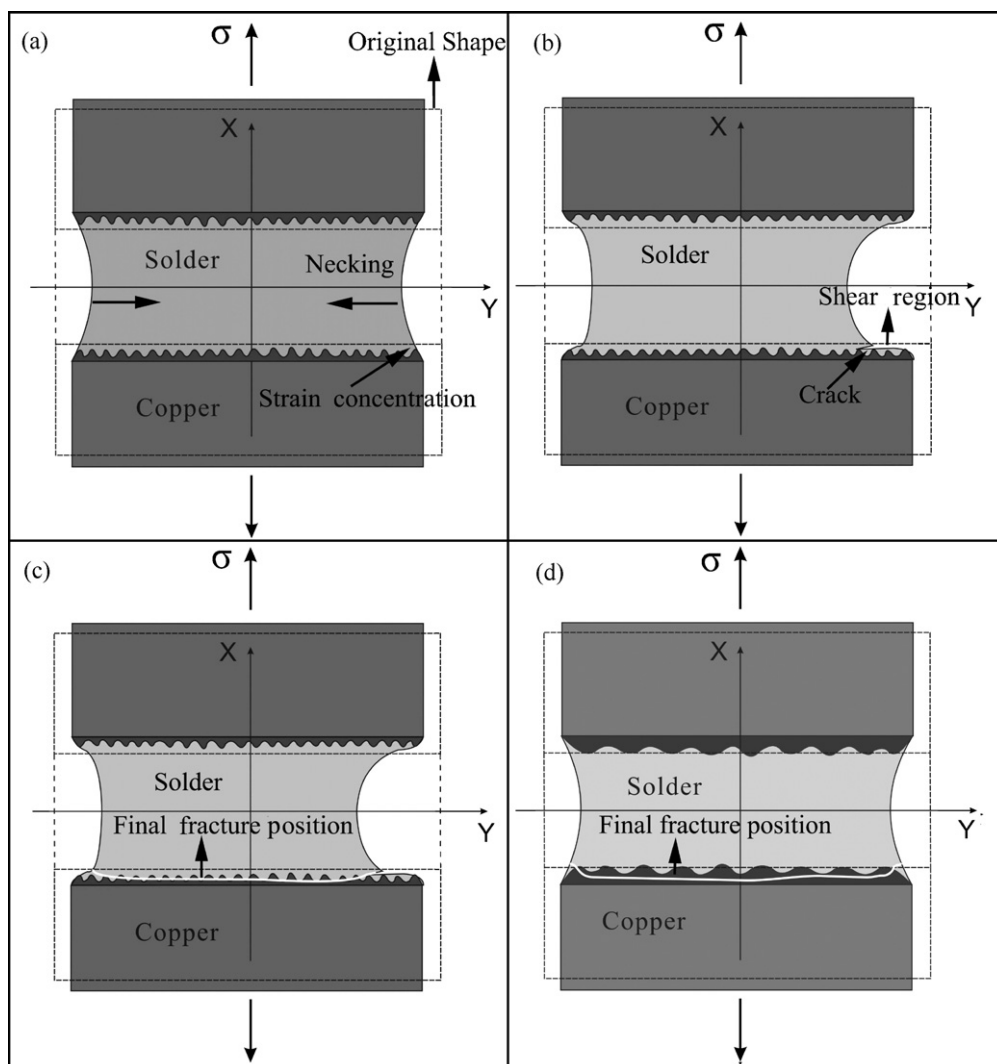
Illustration of the fracture processes of solder joints at low strain rate: (a) plastic strain incompatibility and necking of solder; (b) shear fracture inside the solder near the solder/ Cu_6Sn_5 interface; (c) final brittle fracture in an inter-granular mode; (d) brittle fracture without shear fracture at the interface.
